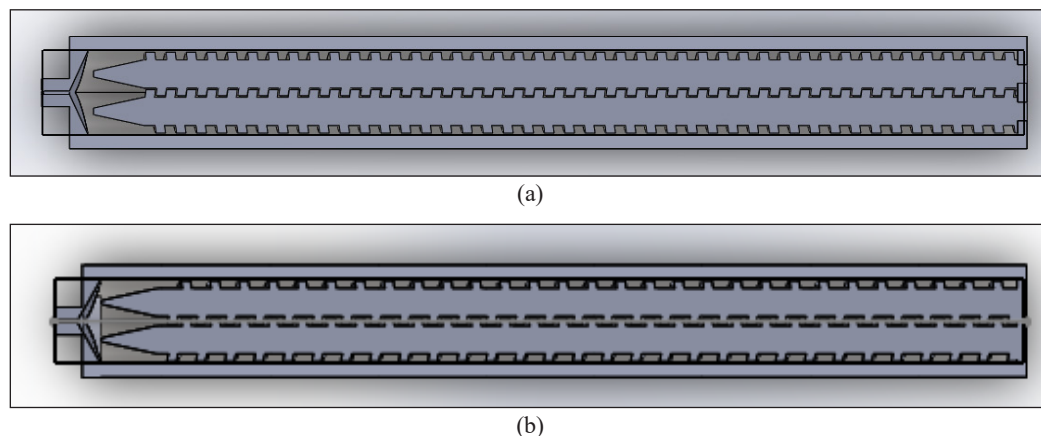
Cross-sectional view of (a) counter-rotating and (b) co-rotating, intermeshing twin-screws
